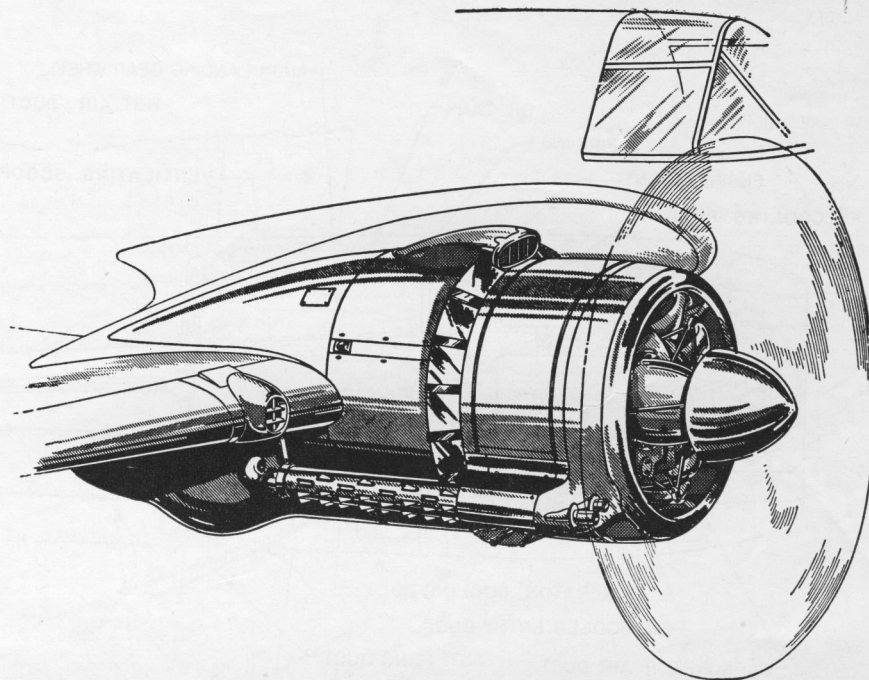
The power unit is equipped with Bristol Hercules 1,650-hp sleeve-valve engines mounting full feathering propellers. The engine units are easily detachable and are interchangeable. Low drag cowling has flaps at the rear to control the engine temperature. An air scoop for the oil cooler is above the engine at the rear.
